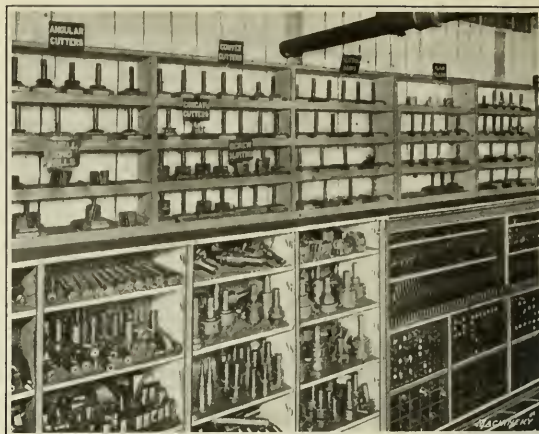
(Upper Section) Method of storing Milling Cutters on Shelves by Means of Special Holders
